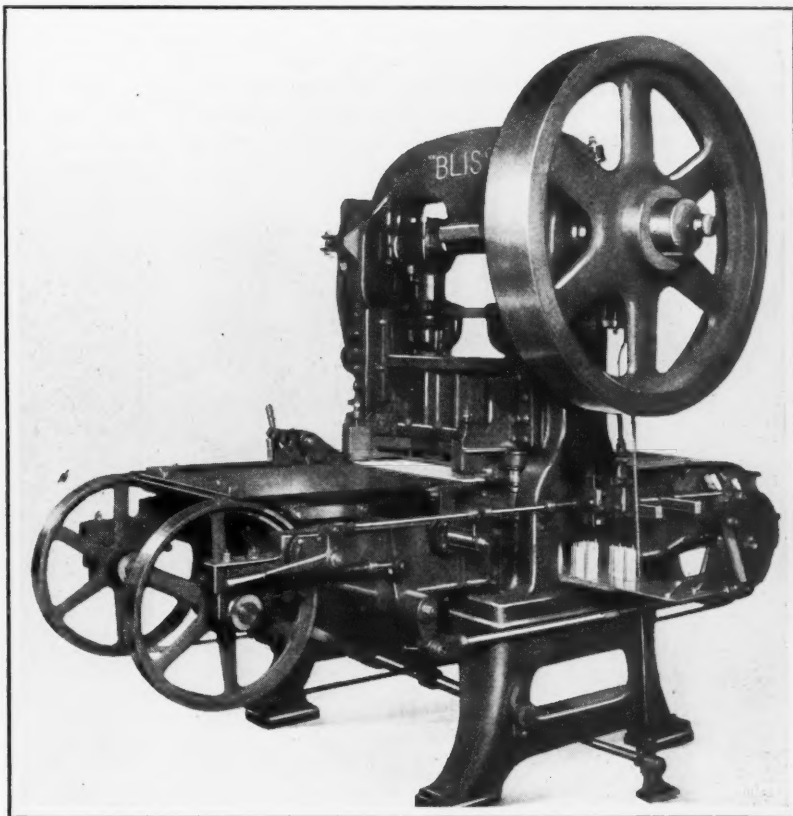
Press for punching Large Sheets, having a Continuous Conveyor Feed of the Band Type
